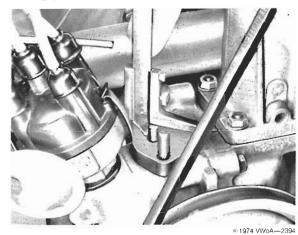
Depth gauge being used to check length of pushrod where it projects from intermediate flange.
